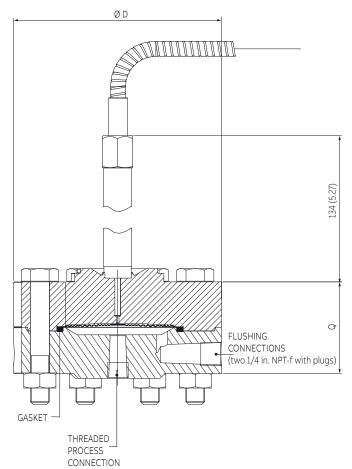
266DRH with barrel housing and direct mount seal S26Mx off-line flanged
